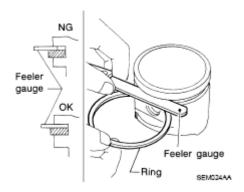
Measuring Side Clearance Of Piston Ring And Piston Ring Groove
